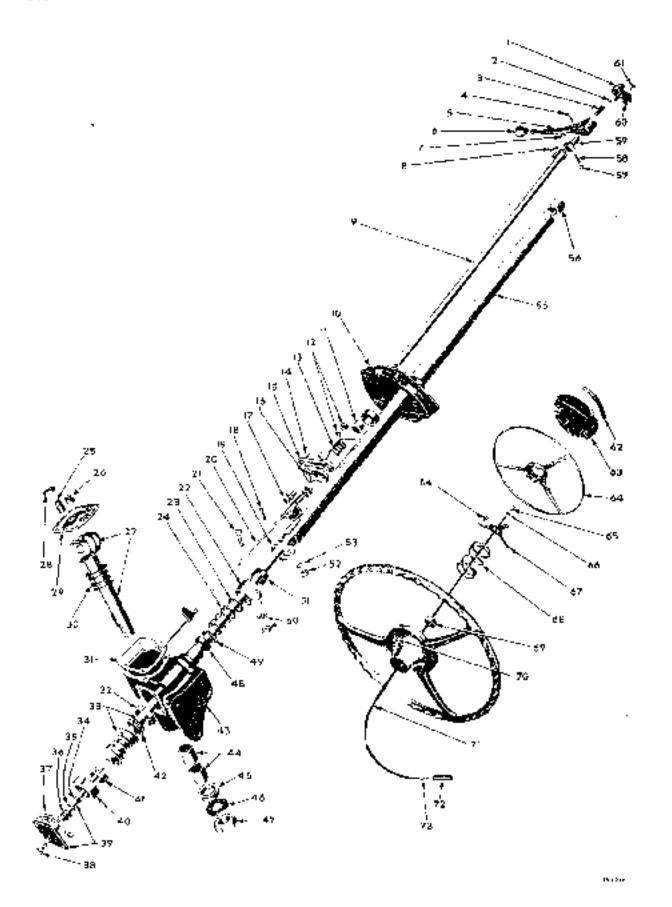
Steering Goor (Disassembled Vlew) (1940 Model)
